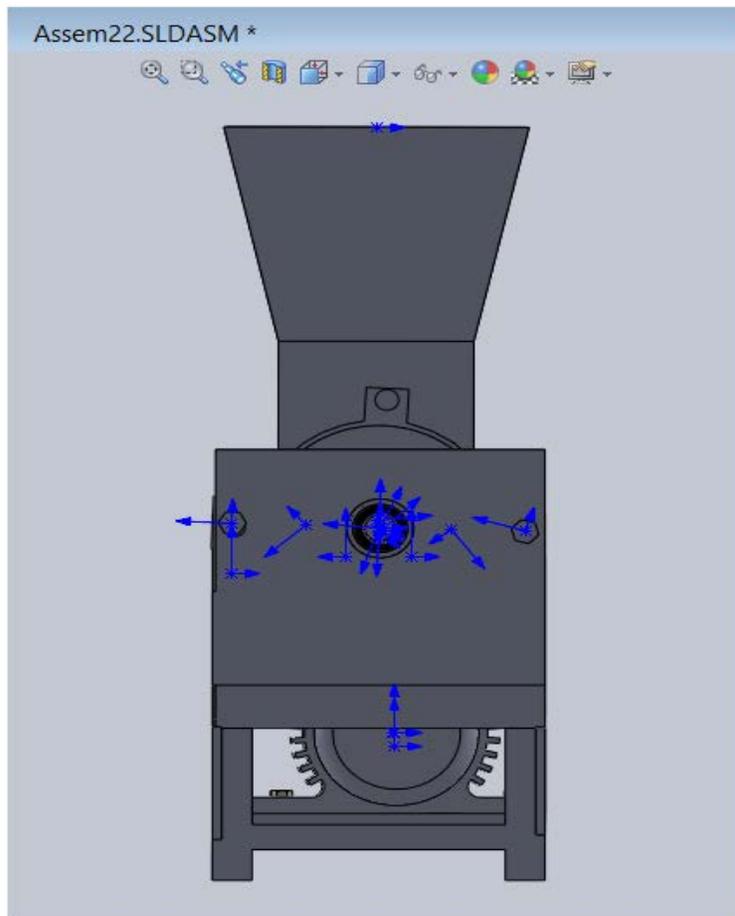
End View of the Continuous Palm Oil Fruits Digesting Machine
